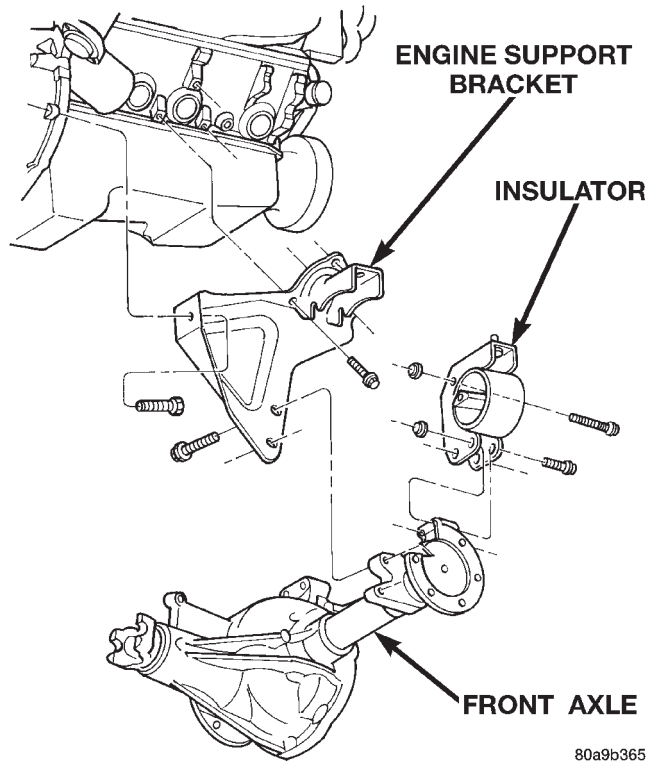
Right Engine Mount Insulator and Support Bracket—4WD Vehicles
